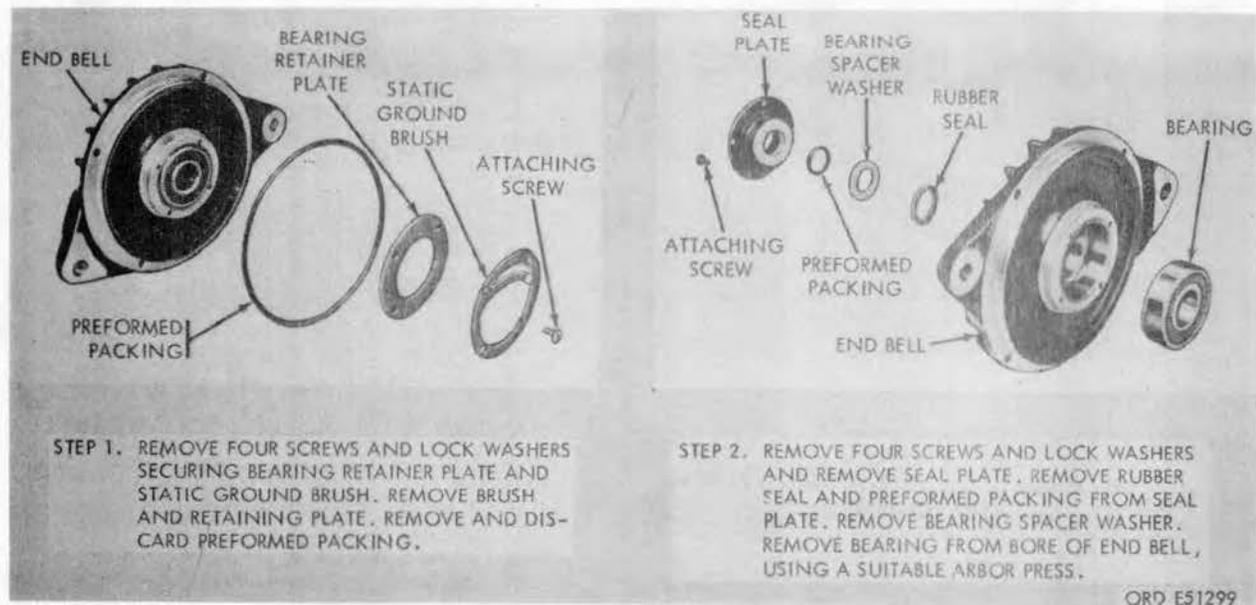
DISASSEMBLING DRIVE END BELL.
